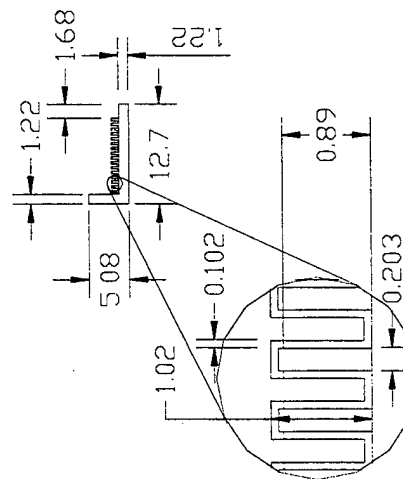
Dimensions of capillary fin assembly (dimensions in mm).
